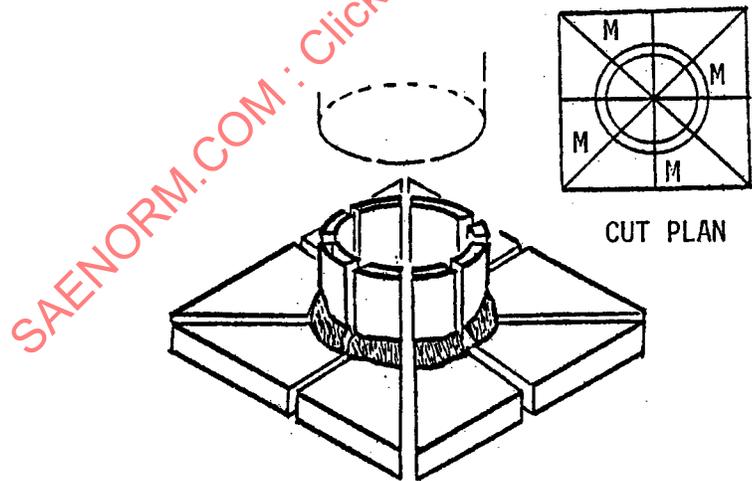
Blank locations for metallographic specimens in fillet-welded tube.
